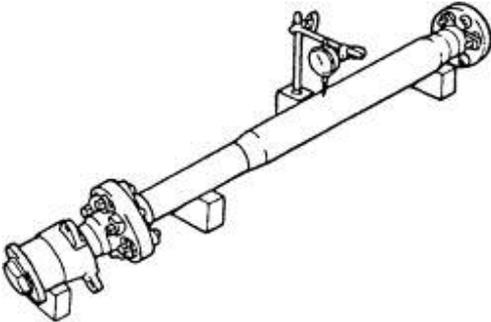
Using a dial indicator to check the runout of the equipment driveshaft
